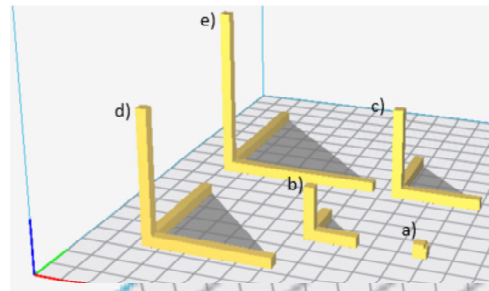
test specimens used in the measurements of dimensional deviations. a) 5mm b) 20mm c)35mm d) 50mm e) 65mm.
